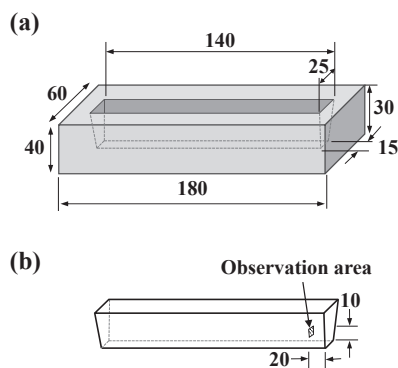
Schematic drawing of permanent mold (a) and observed area (b) of casting (mm).
